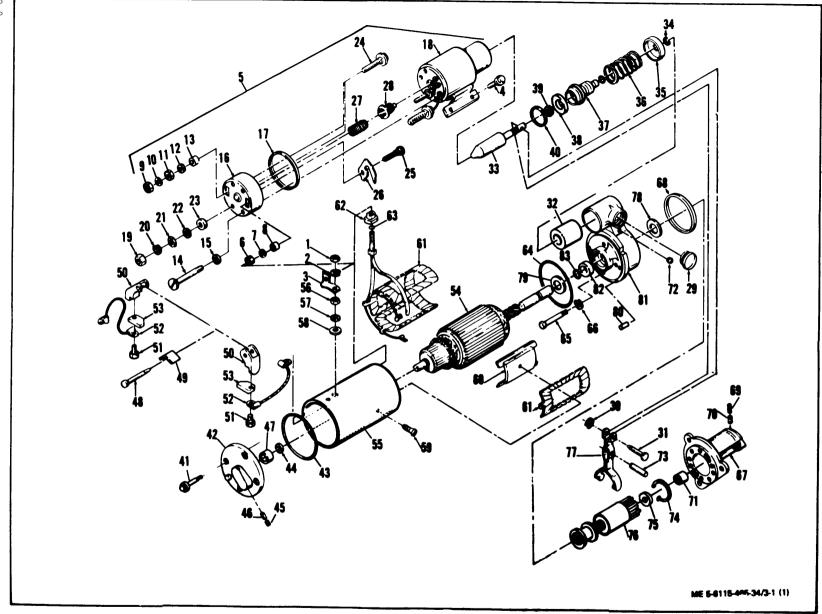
Starter Assembly, Exploded View (Shest 1 of 2)
